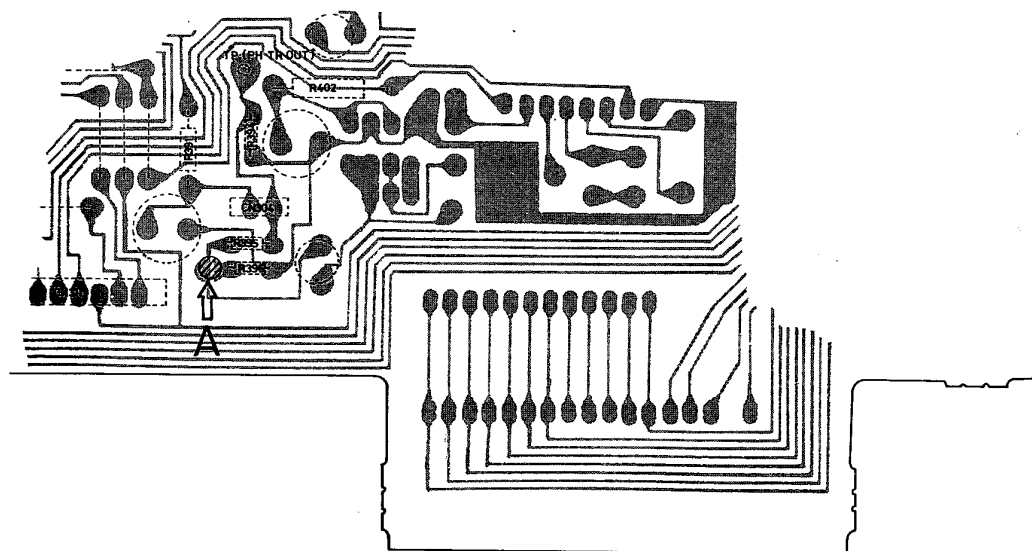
Adjustment location (on foil side of Mother assembly)
